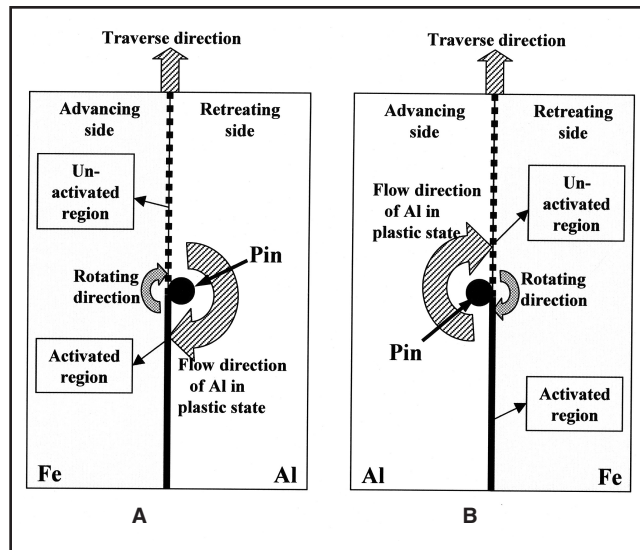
Schematic illustration showing plastic flow direction of aluminum for aluminum-to-steel FSW: A — clockwise pin rotation of a pin; B — counterclockwise pin rotation.
